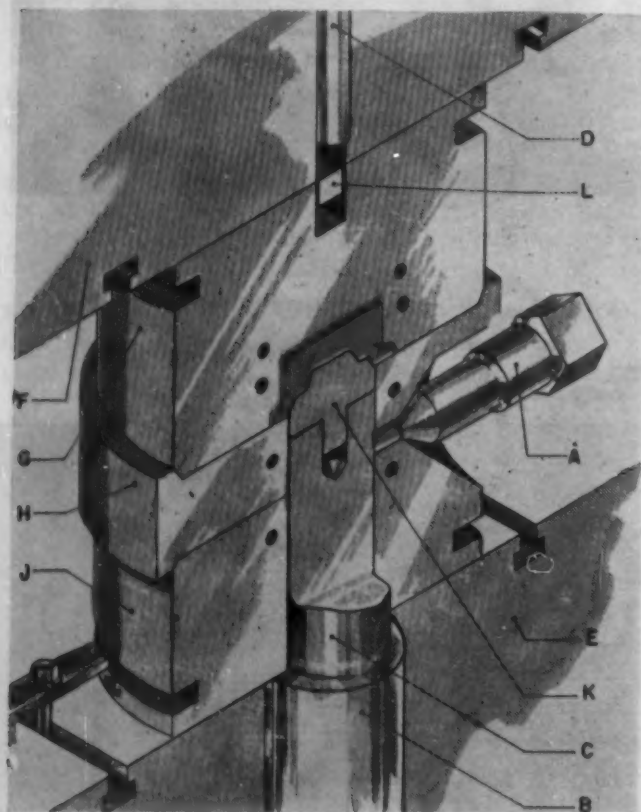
PHOTO AND DRAWING, 3-11, COURTESY IMPROVED PAPER MACHINERY CO.
